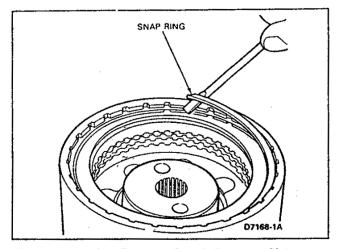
Removing Forward Clutch Pressure Plate Snap Ring
